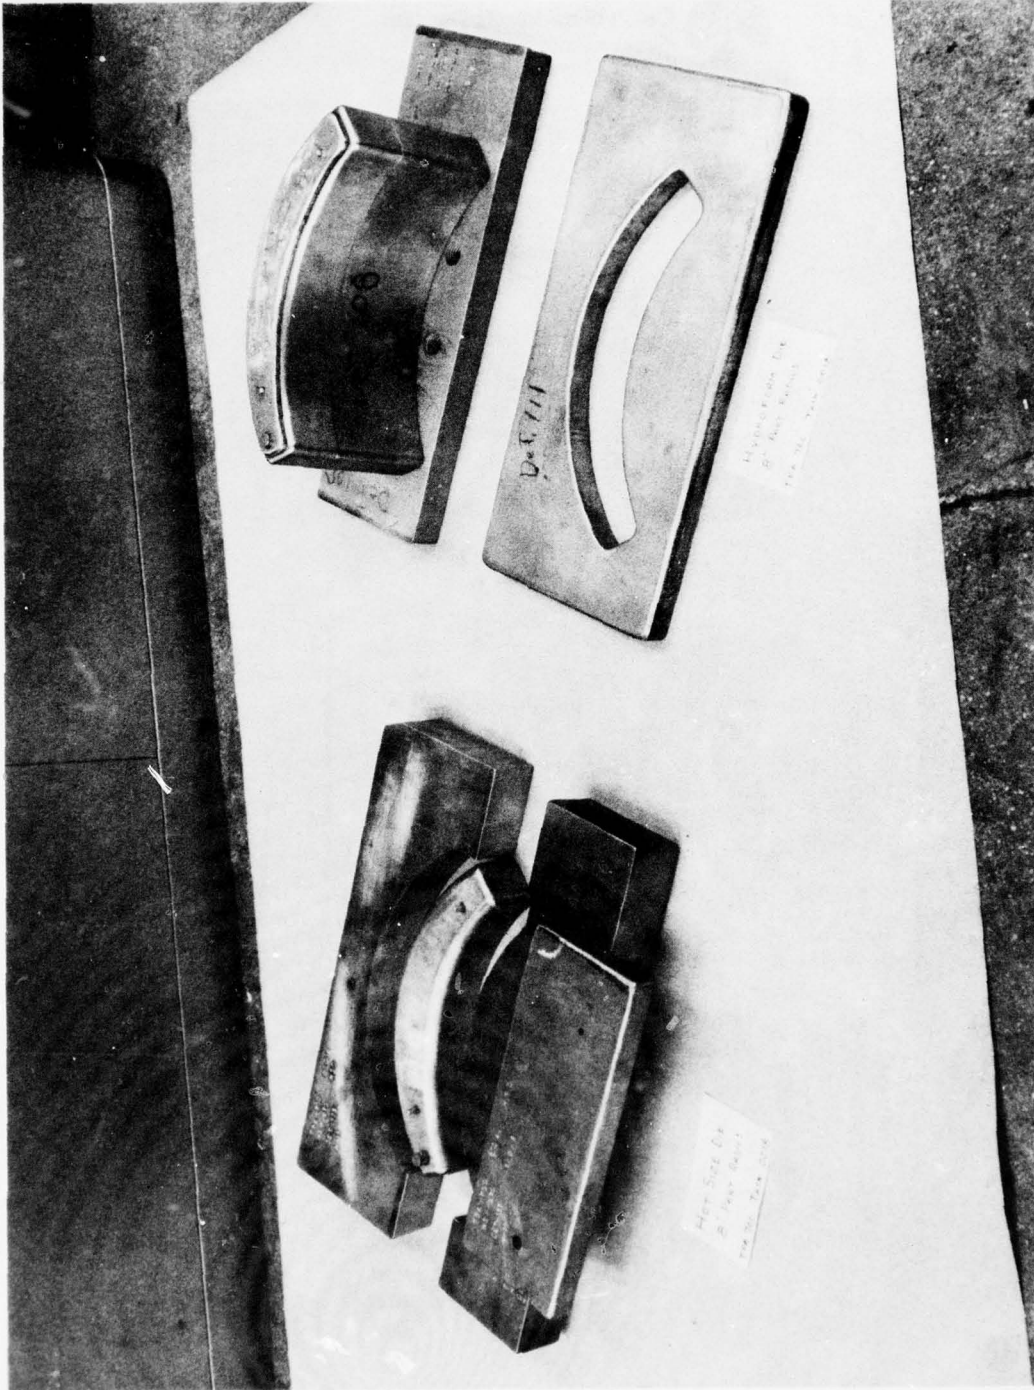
PHOTOGRAPH OF HYDROFORM (DRAW FORM) TOOLING FOR STRETCH AND STRETCH FLANGES WITH 8" PART RADIUS (RIGHT SIDE)
